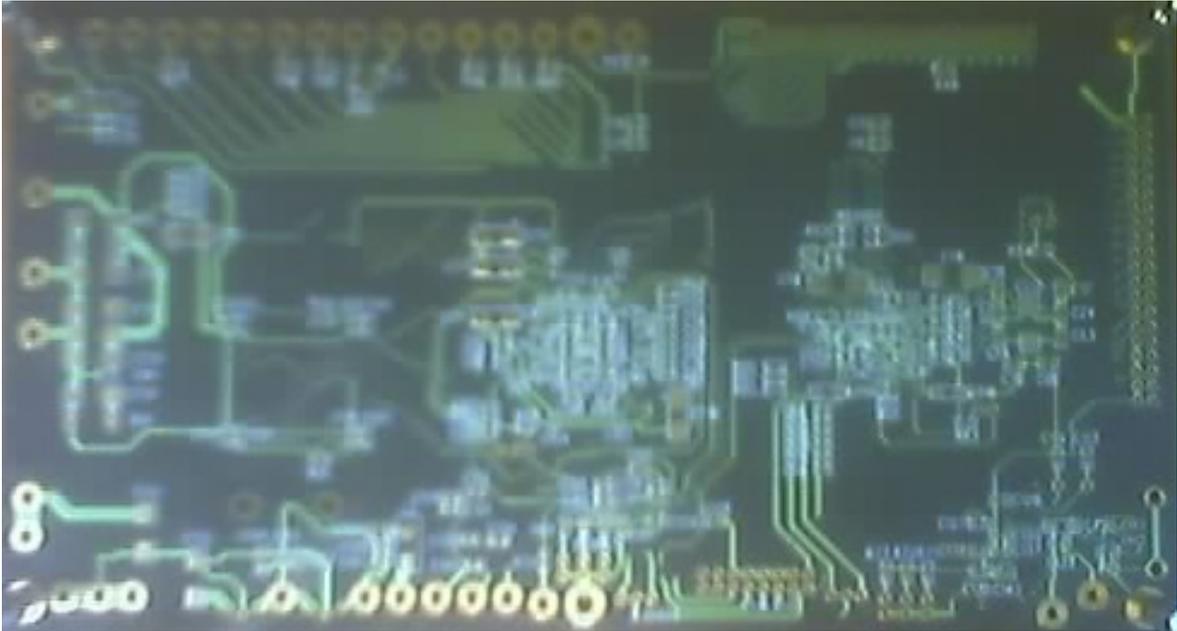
6-Layer Priamos DSP Engine PCB Bottom-Side.
